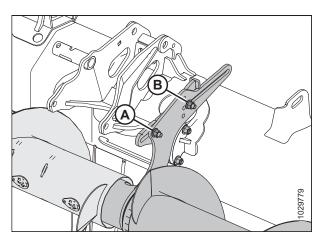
Initial Position of Adjustable Mounts – Three-Piece Auger
